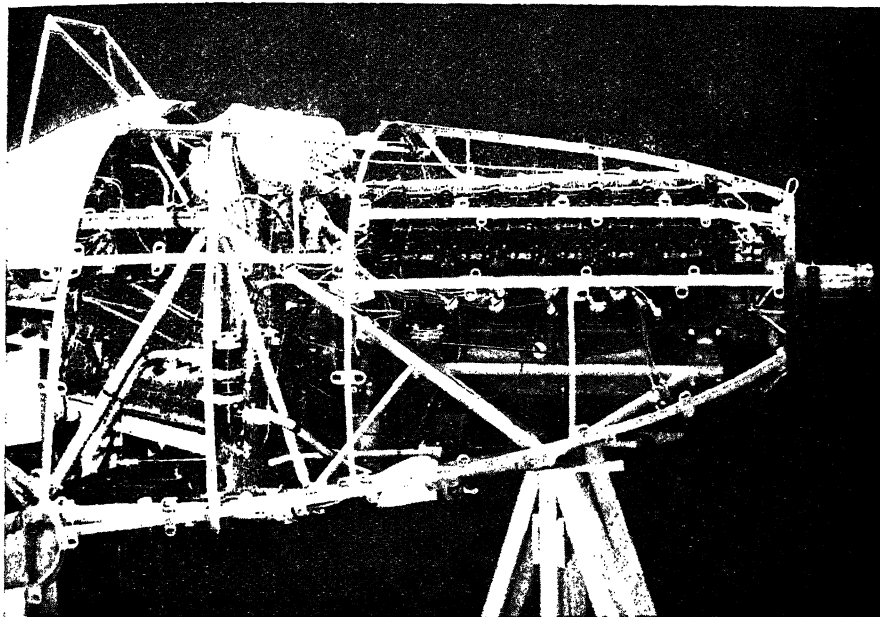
SHOWING THE ENGINE AFTER BOLTING TO THE MOUNTING
